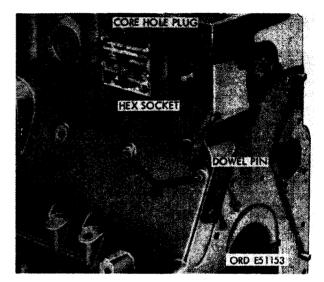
REMOVING OR INSTALLING CYLINDER AND CRANKCASE PIPE PLUGS - RIGHT FRONT VIEW.
